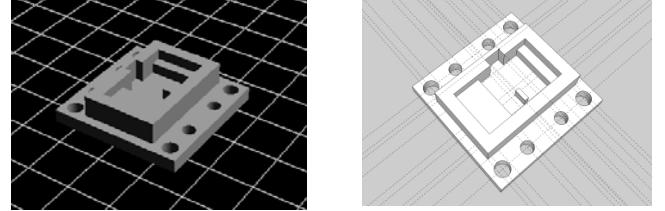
3D DRAWING HOLDER ECO NODE
